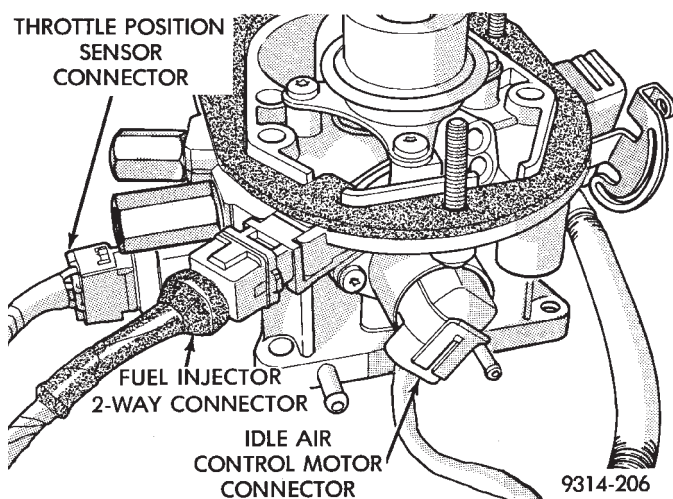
Throttle Body Wiring Connection to Main Harness
